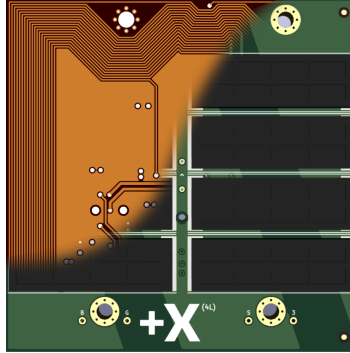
Solar panel PCB inner layers with integrated magnetorquer coils
